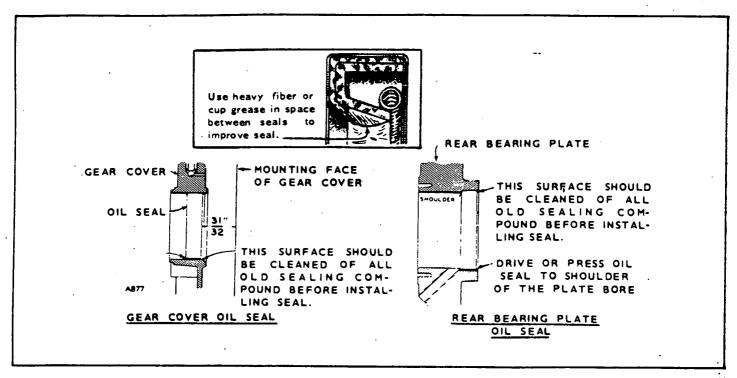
FIGURE ST. GEAR COVER AND REAR BEARING PLATE OIL SEALS
